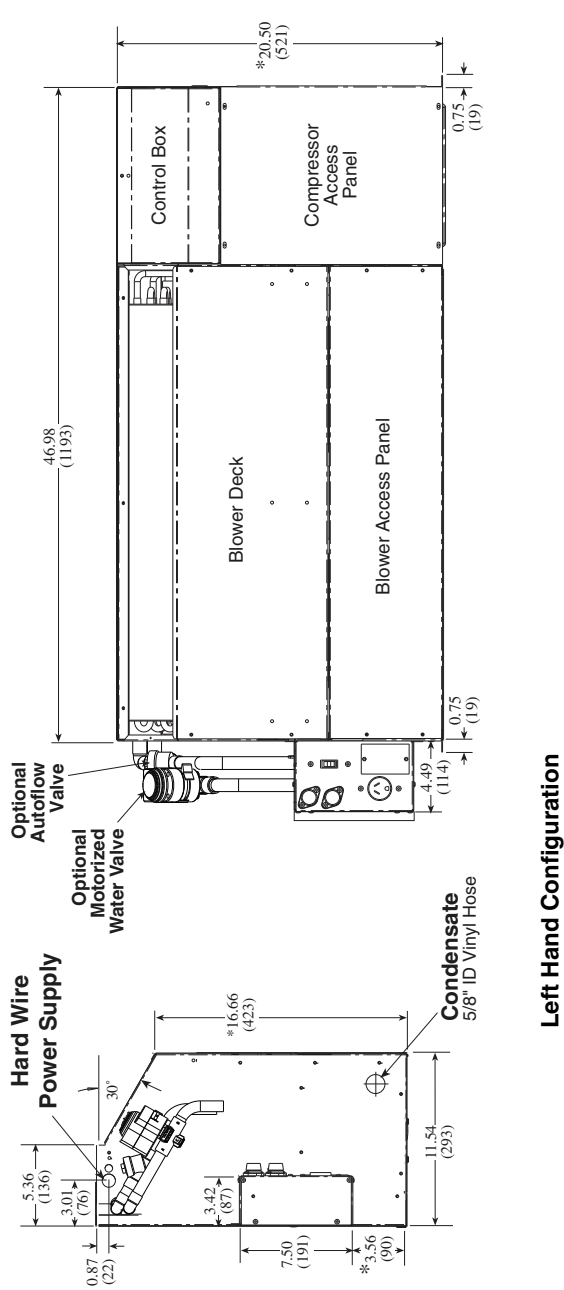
50PEC09-15 Chassis Dimensions — Front Return
